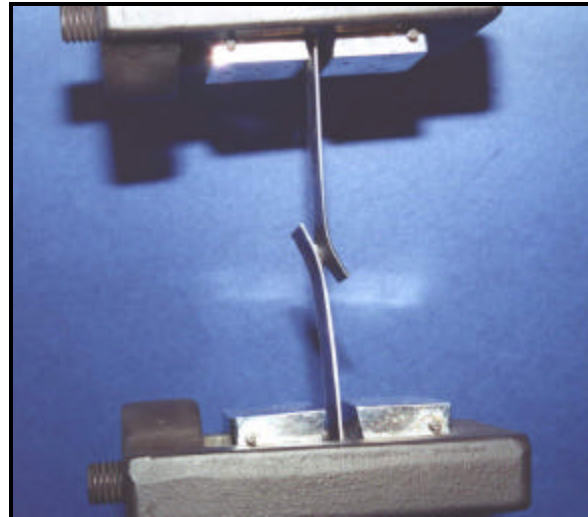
TENSILE TEST OF WELD COUPON
